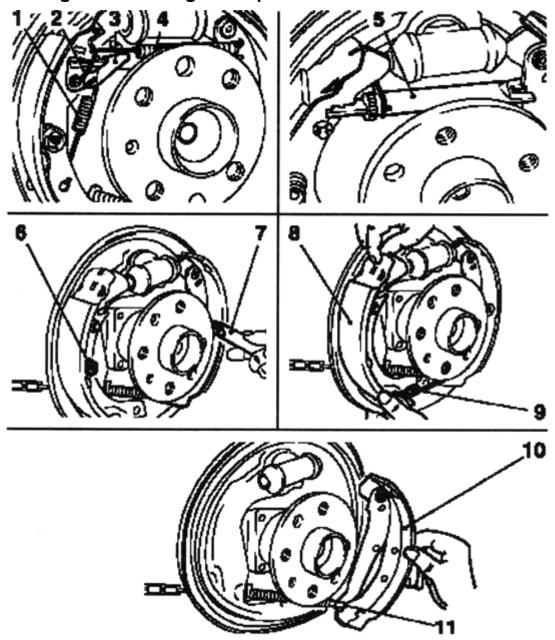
Withdrawal Braking shoes rear wheels:
